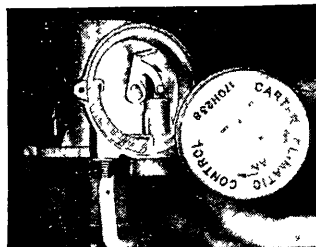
Install strainer and thermostatic coil and housing. Install coil housing with indicator mark to bottom. Then revolve housing $\frac{1}{2}$ turn counter-clockwise and set indicator as specified in Automatic Choke chapter
